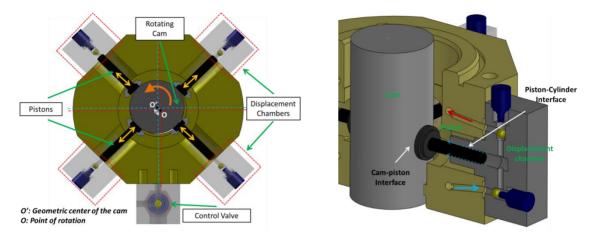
(Left) Radial piston pump design used in the present study; (right) Lubricating gaps in a typical rotating cam type radial piston pump
